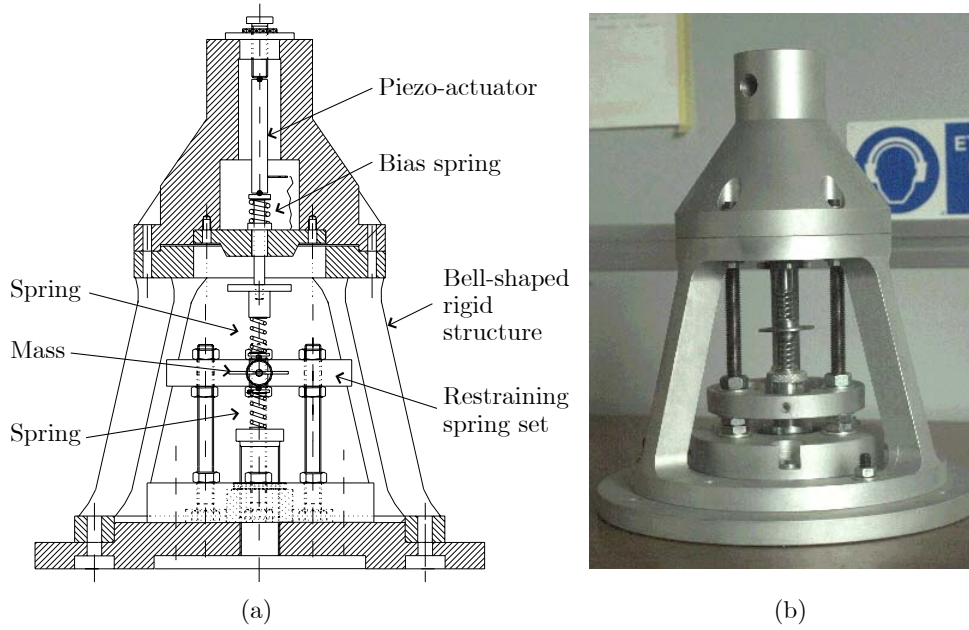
Test rig for the identification uniaxial mechanical system: (a) a drawing; (b) a photo
